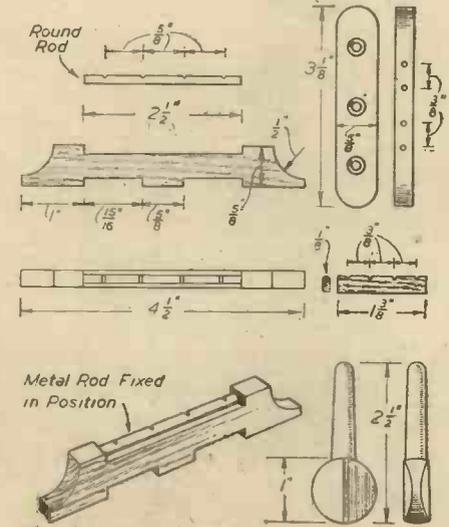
The bridge, anchor, and details of nut and pegs.
